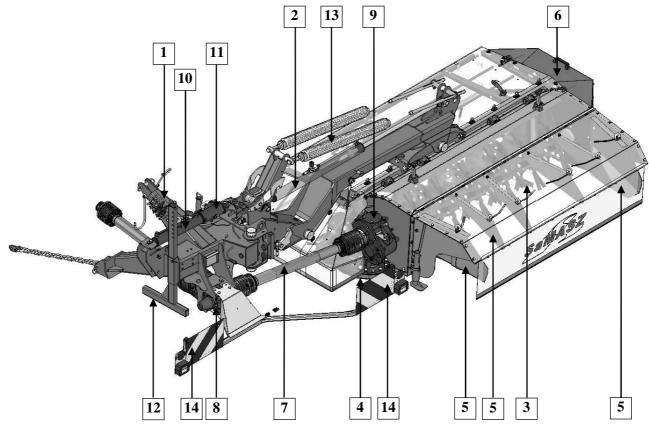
Parts of SaMASZ rear disc mower with swath conditioner (KT S/SL (H))
